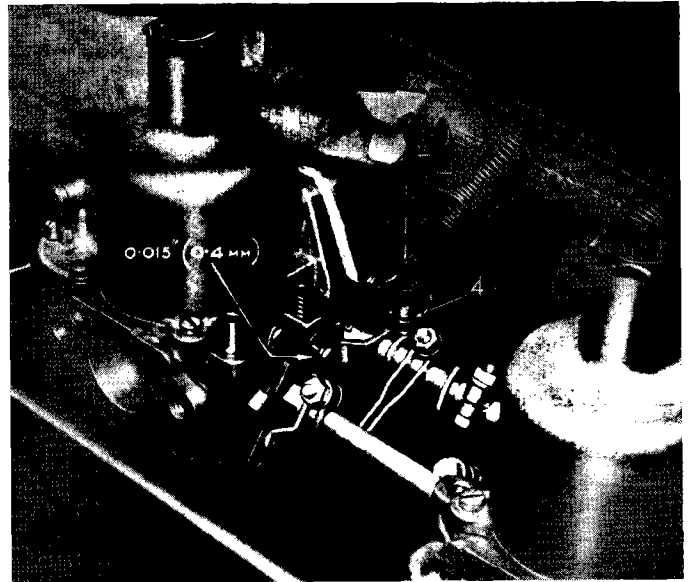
Adjusting throttle spindle clamps to give clearance of peg in fork
